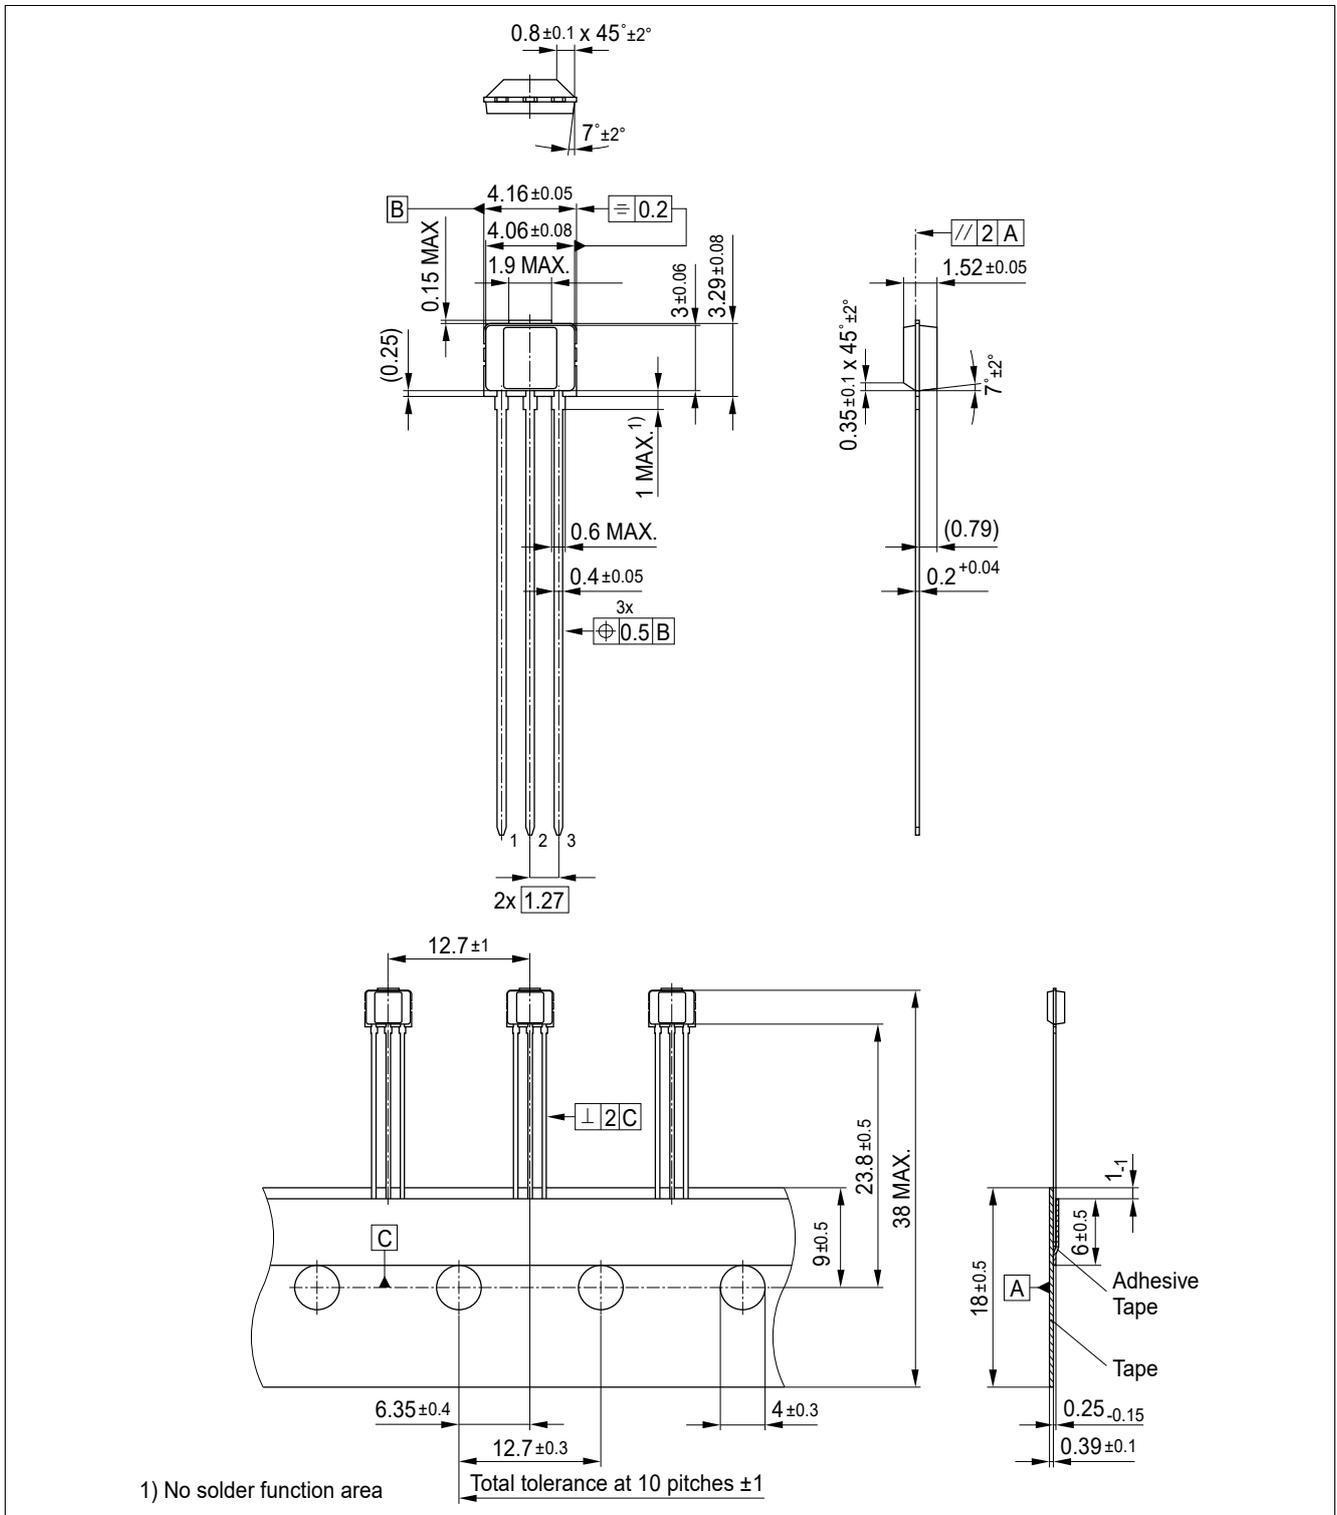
PG-SSO-3-2 package outline (all dimensions in mm)
